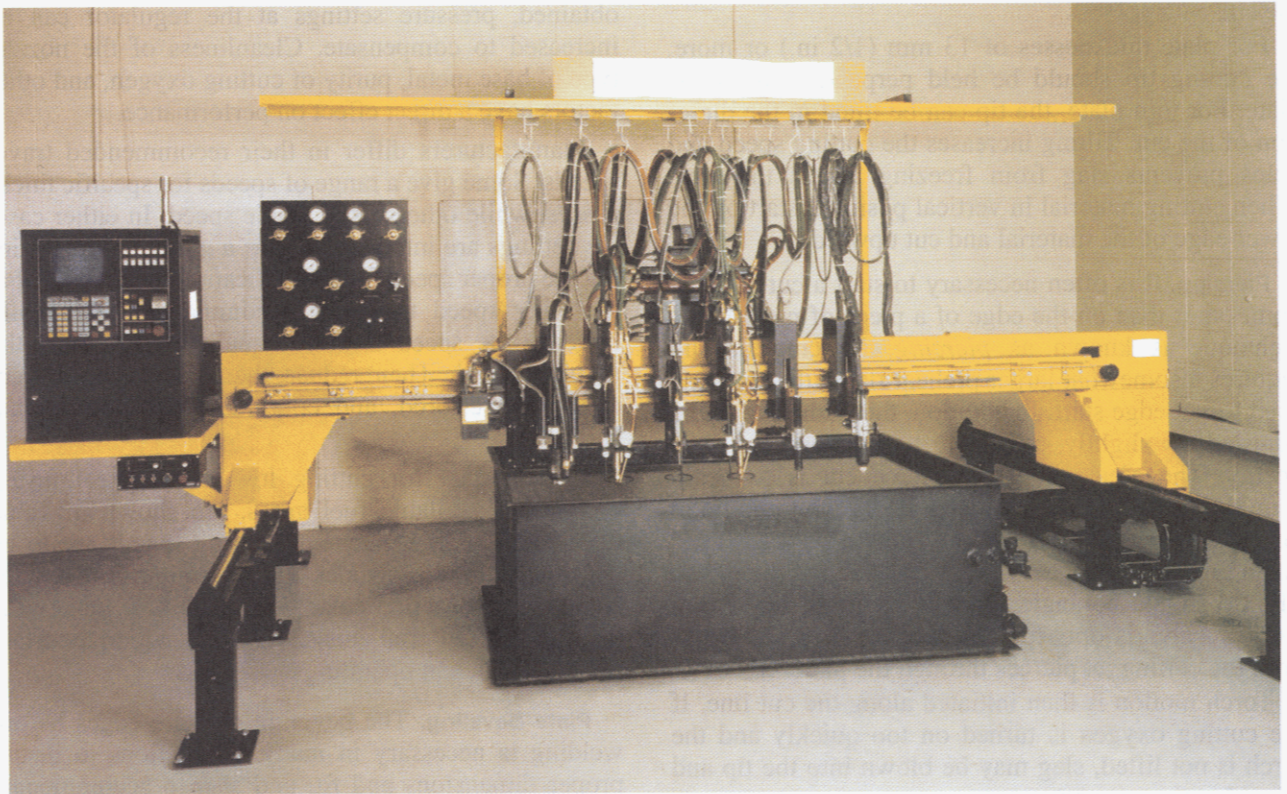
Gantry Type Shape Cutting Machine with Computer Control
